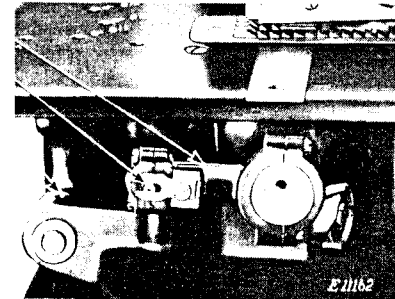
OILING POINTS AT LEFT OF MACHINE
